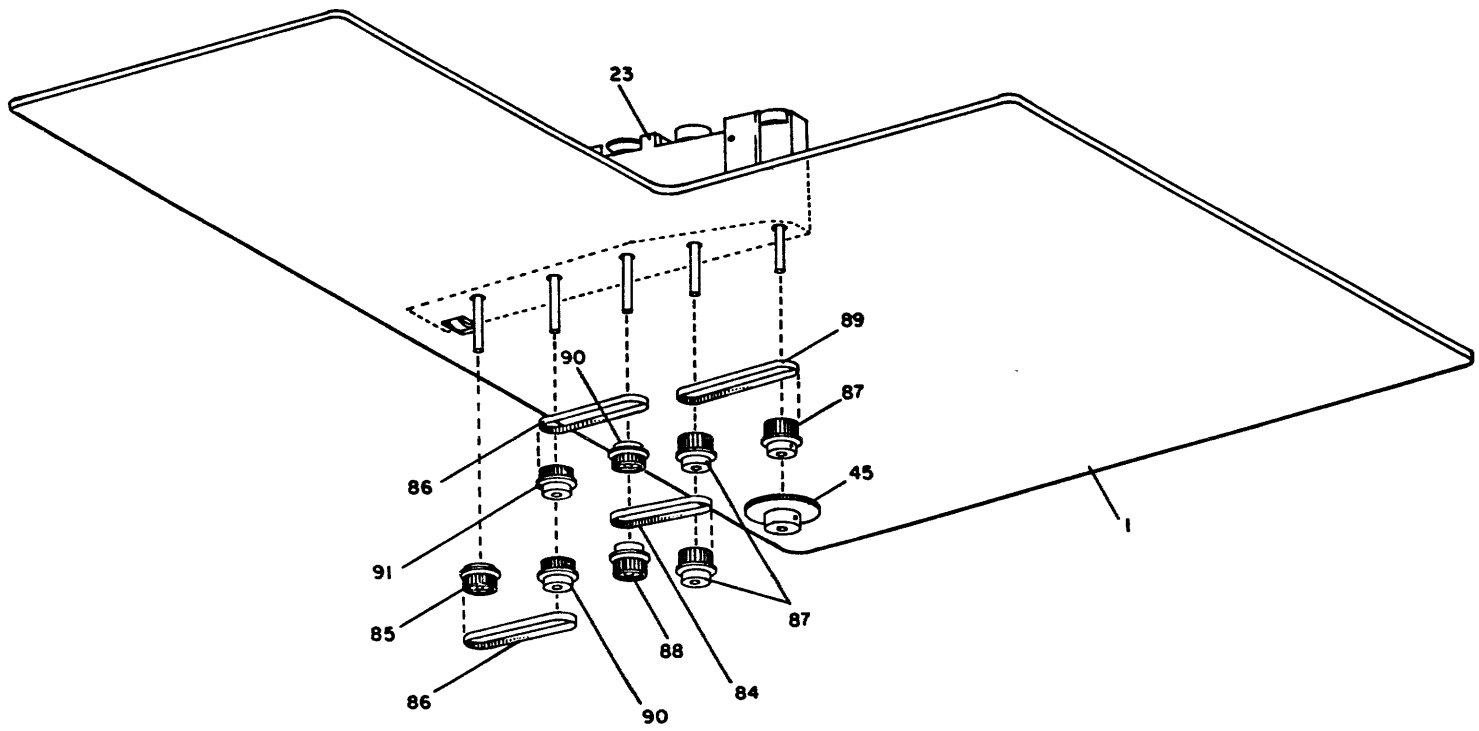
TOP PLATE ASSEMBLY (sheet 4 of 4)
